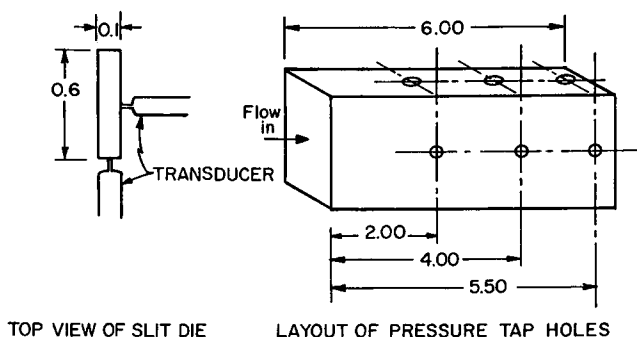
Layout of pressure tap holes in rectangular duct die.
